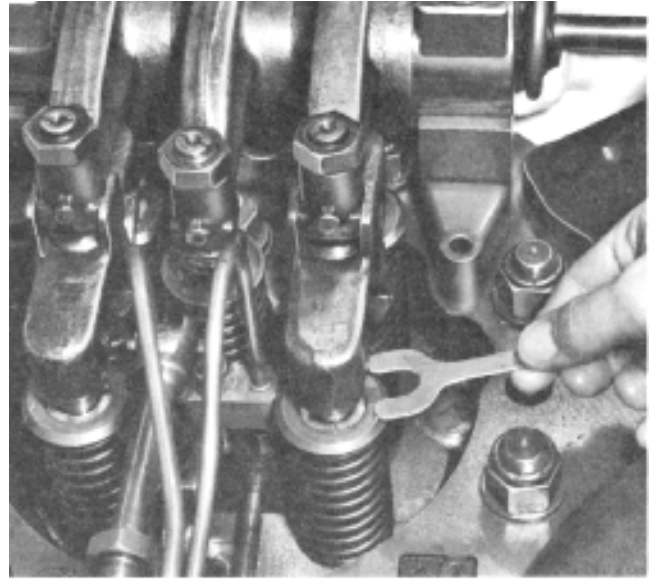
Checking Lash Adjuster To Valve Clearance
